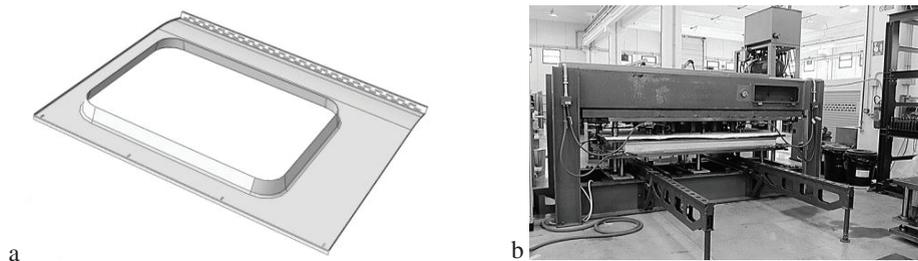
Case study: (a) 3D drawing of the investigated component, (b) press machine used for the experimental trials
